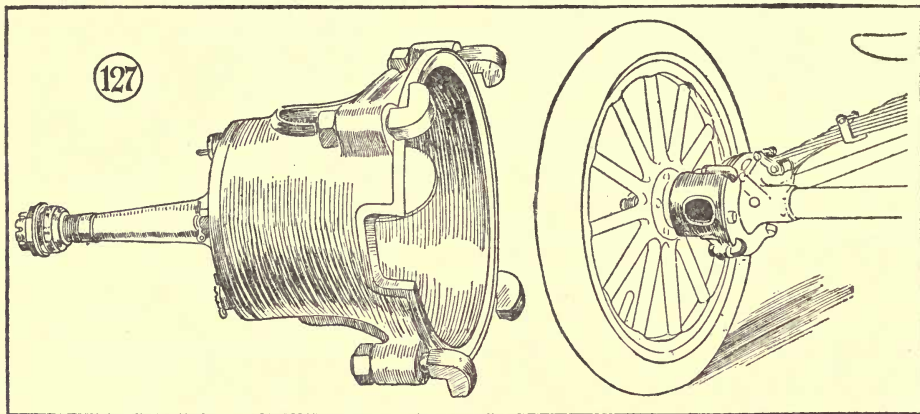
A device for towing a Ford with a broken axle. A front wheel is mounted on the spindle and the clamps tightened over the axle
